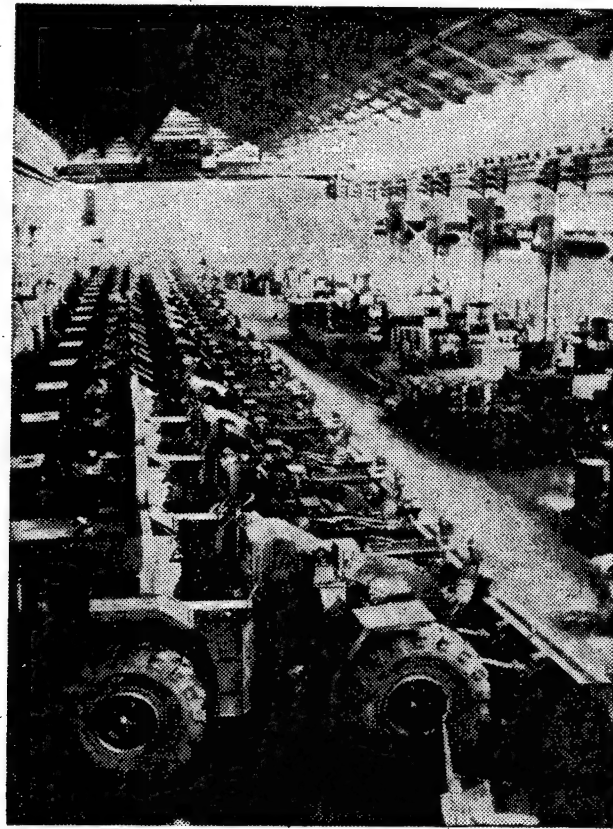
A sectional view of the Xiamen Construction Machinery Plant's assembly workshop in Fujian.
